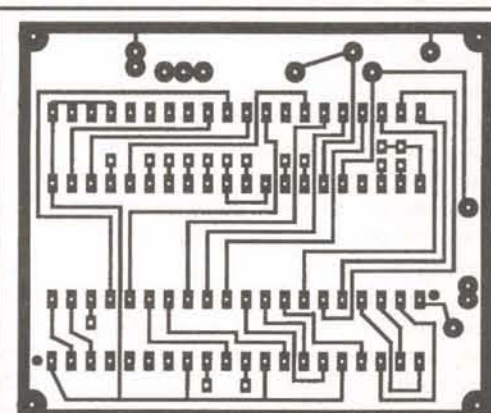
Printed layout of the display board shown full size as seen from the copper side.
